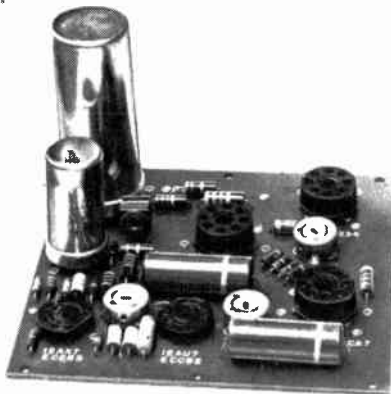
Printed circuit for the Ultra-Linear II is completely wired and tested as received by the kit builder.
